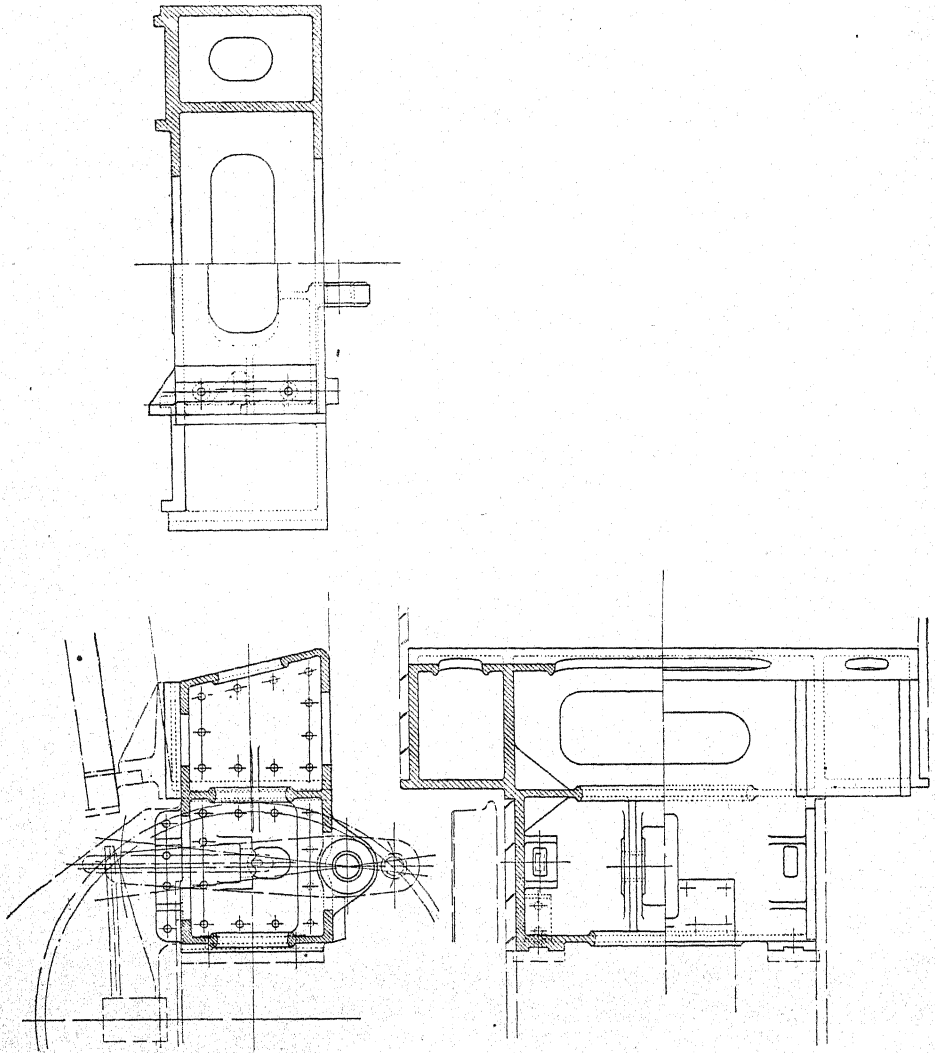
Steel casting joining main and rear frames in rivetted construction.
